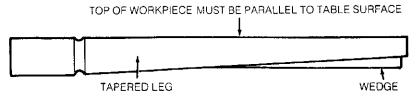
When fluting tapered workpieces, cut a wedge to make the top side of your workpiece parallel with the table surface during operations.
